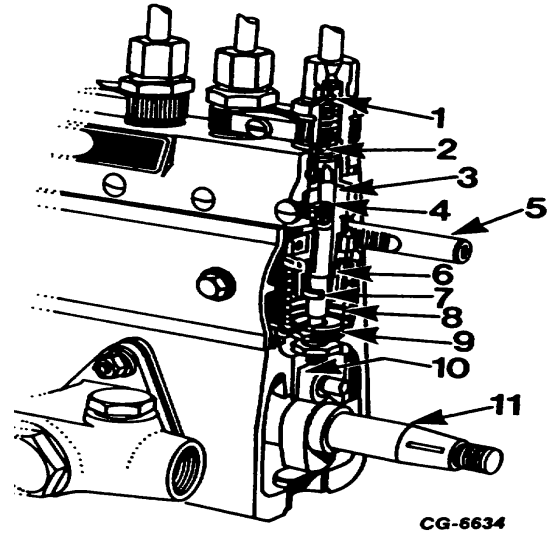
Sectional View of Plunger and Barrel Pumping Element
